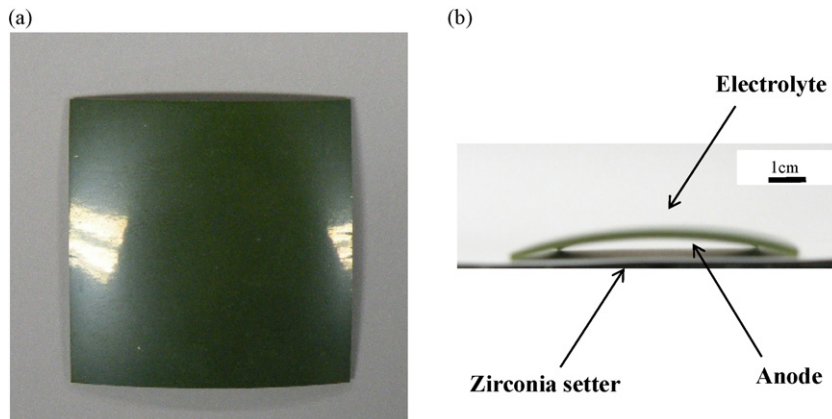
Warpage of sintered anode-supported electrolyte: (a) top view and (b) side view.
